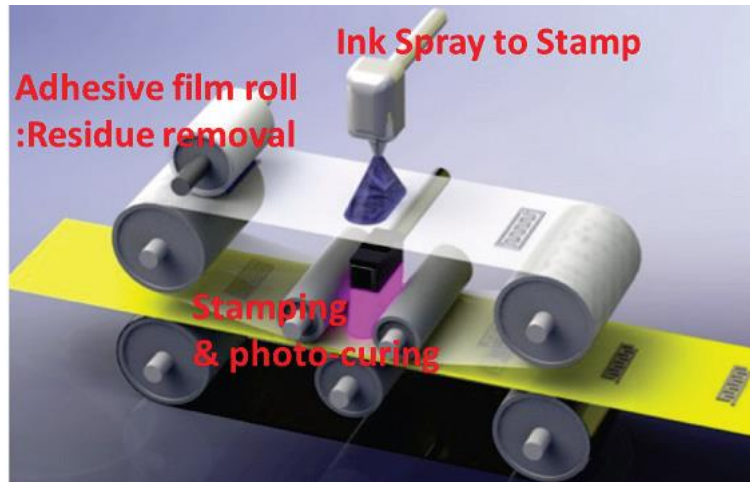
Conceptual design of a strain sensor fabrication roll-to-roll system equipped with spraying and photo-curing systems[48]. Reprinted with permission.
